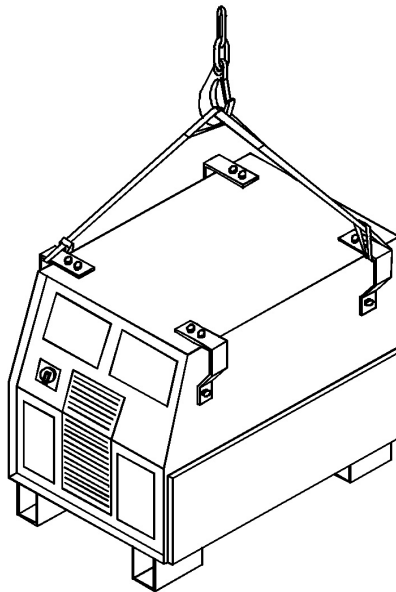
Proper hoisting technique of a Nelweld power supply using two handles.
